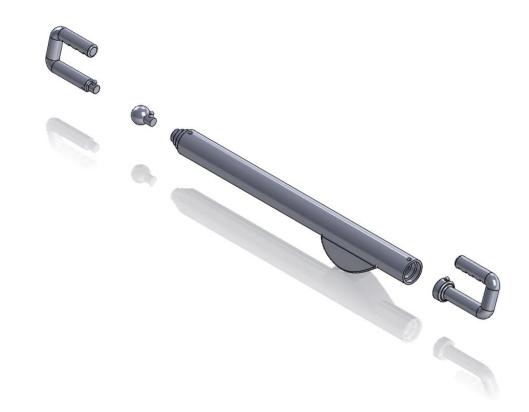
Collapsed Assembly with Interchangeable & Removable White Cane Tip/ Handle Attachments
